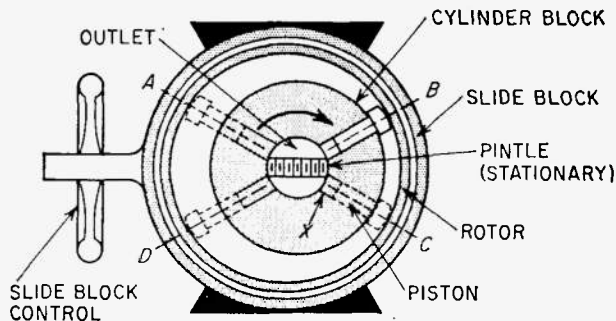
Radial-piston Hydraulic Pump With Rotating Piston Housing [One piston is shown at four positions—A, B, C, and D]
